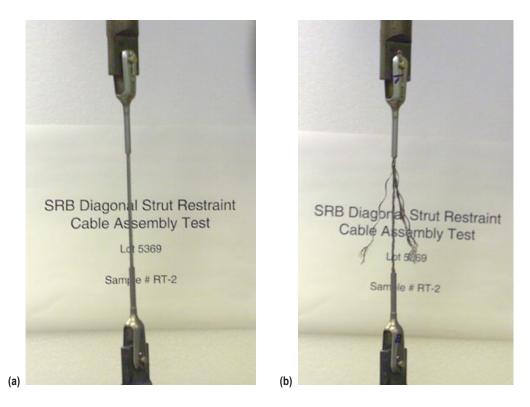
5369–RT–2 (a) before testing and (b) after testing.
